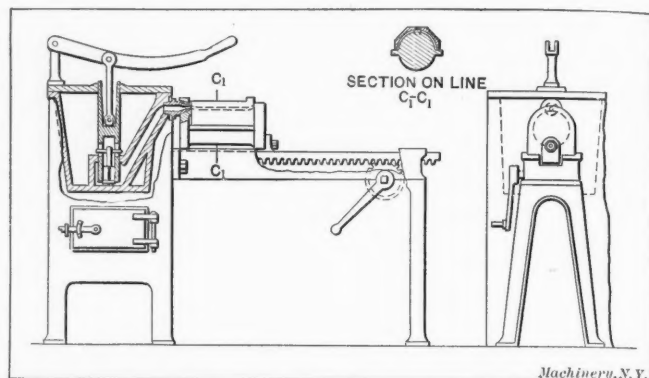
First Die-casting Machine built for Miscellaneous Work (1877) set up for Casting Bearings
